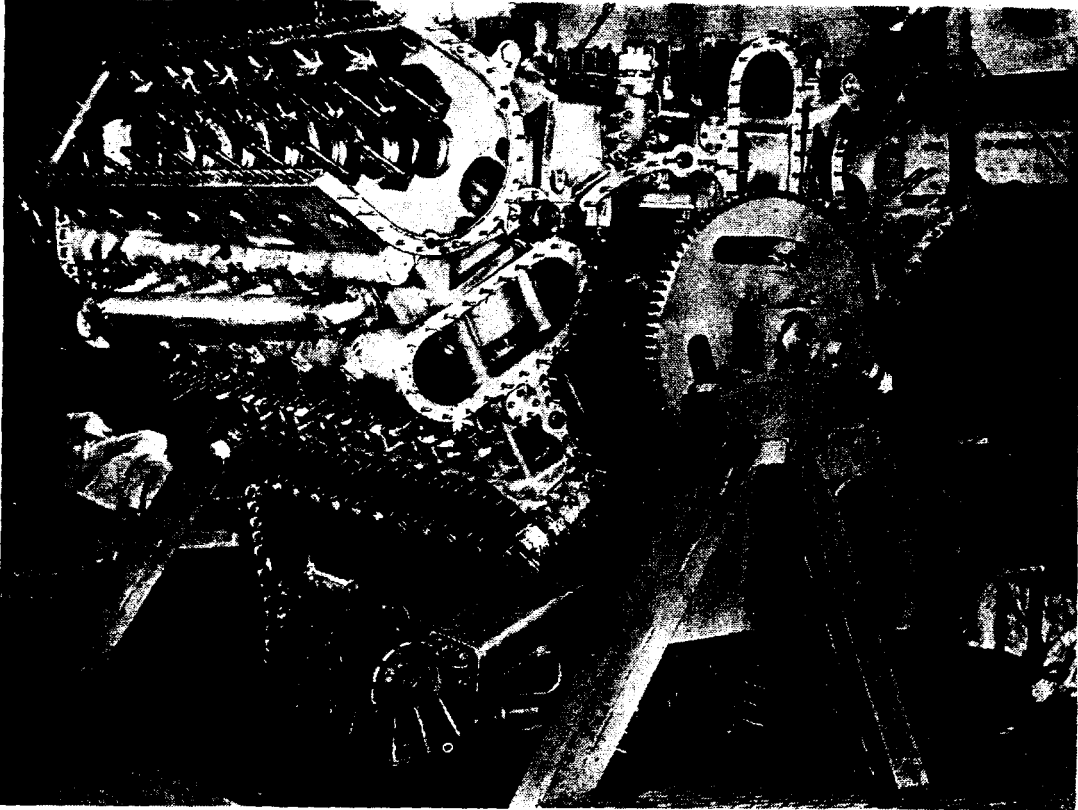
PORT ENGINE TRIANGLE ON ASSEMBLY STAND
